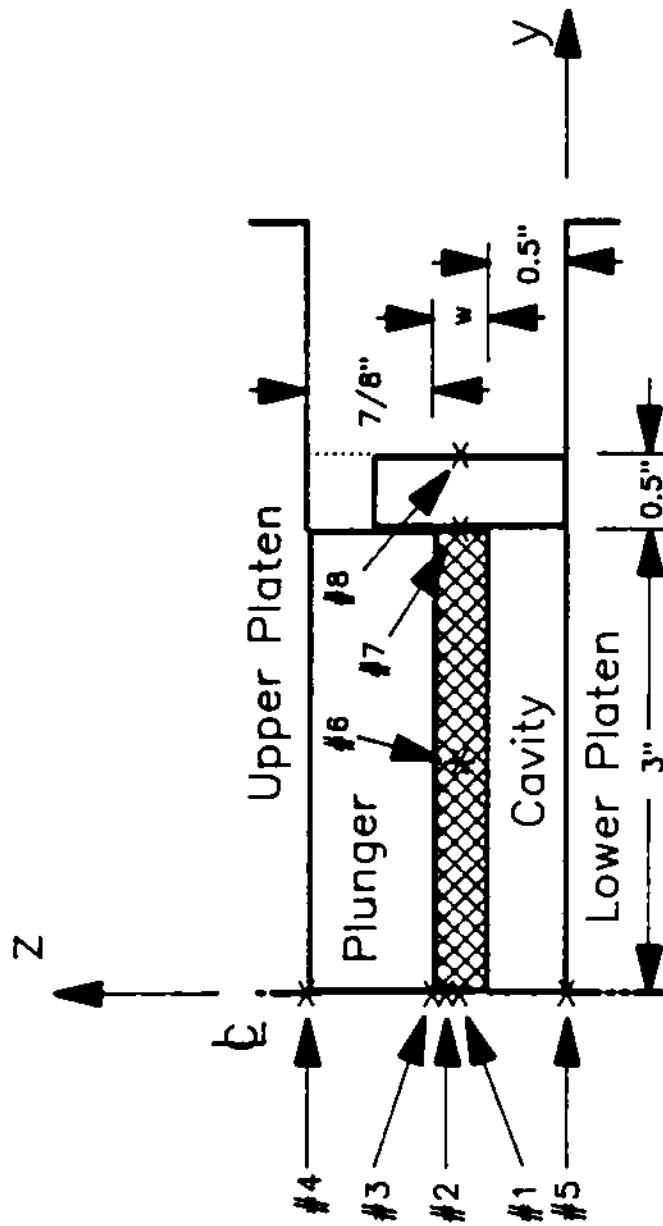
Cross-section of the 64-ply T300/1700 unidirectional composite processing assembly and locations of the thermocouples.
